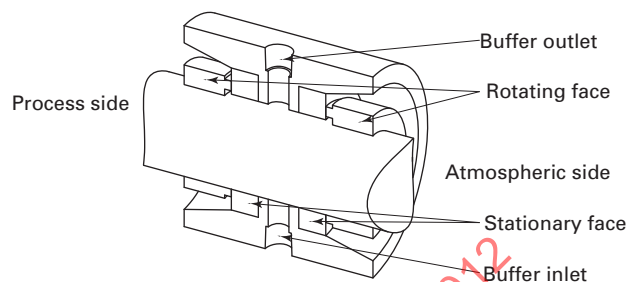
Dual Unpressurized Mechanical Seal for Pumps
